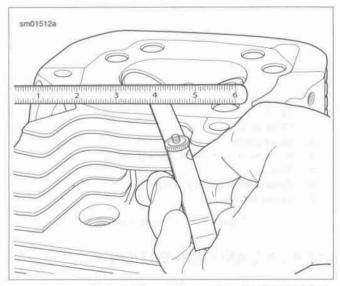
Gasket Surface: Flat Within 0.006 in (0.152 mm)
